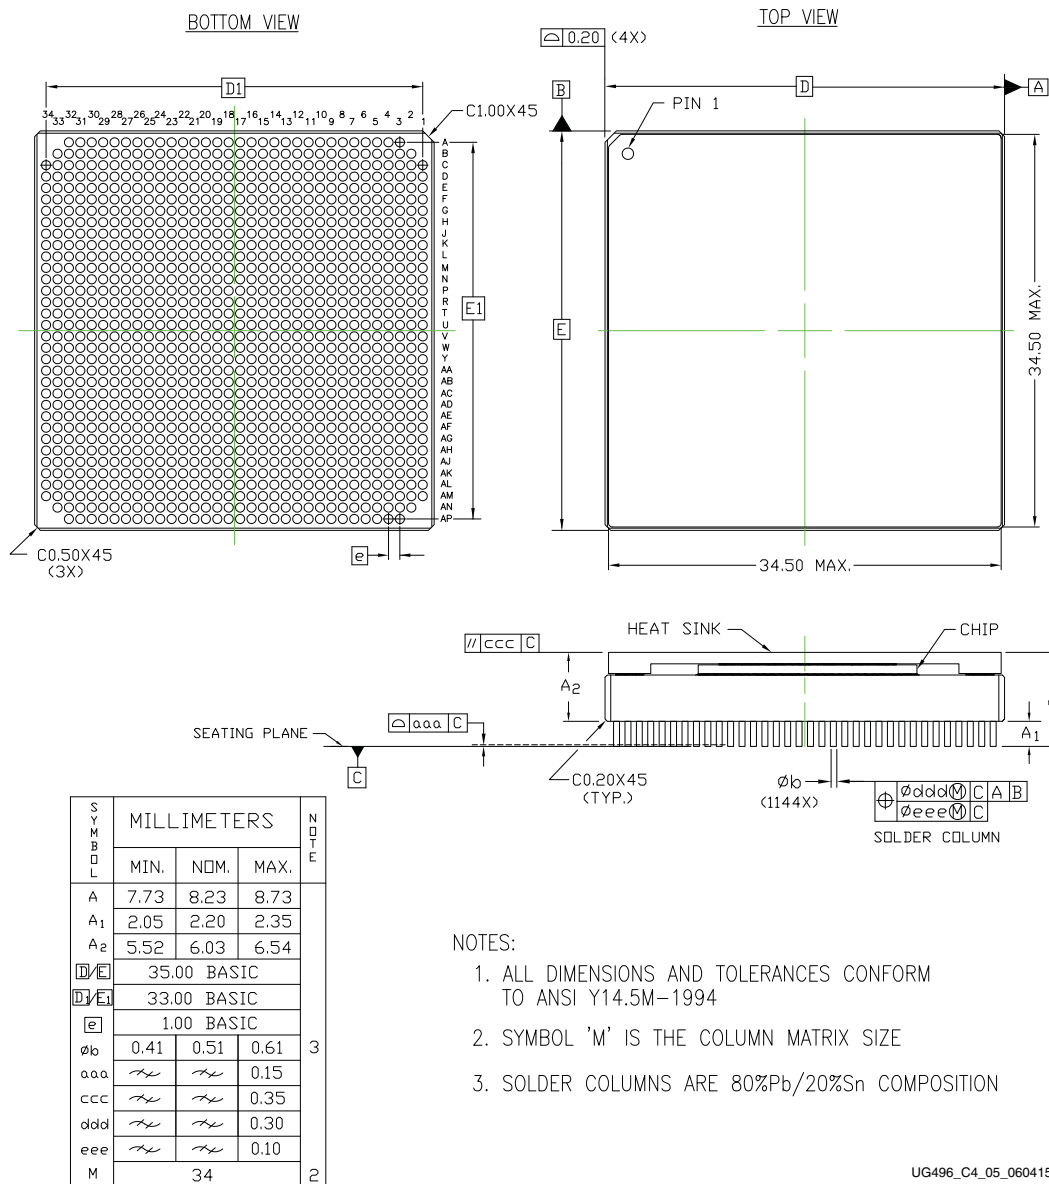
CN1140 Ceramic Flip-Chip Column Grid Package Mechanical Drawing
